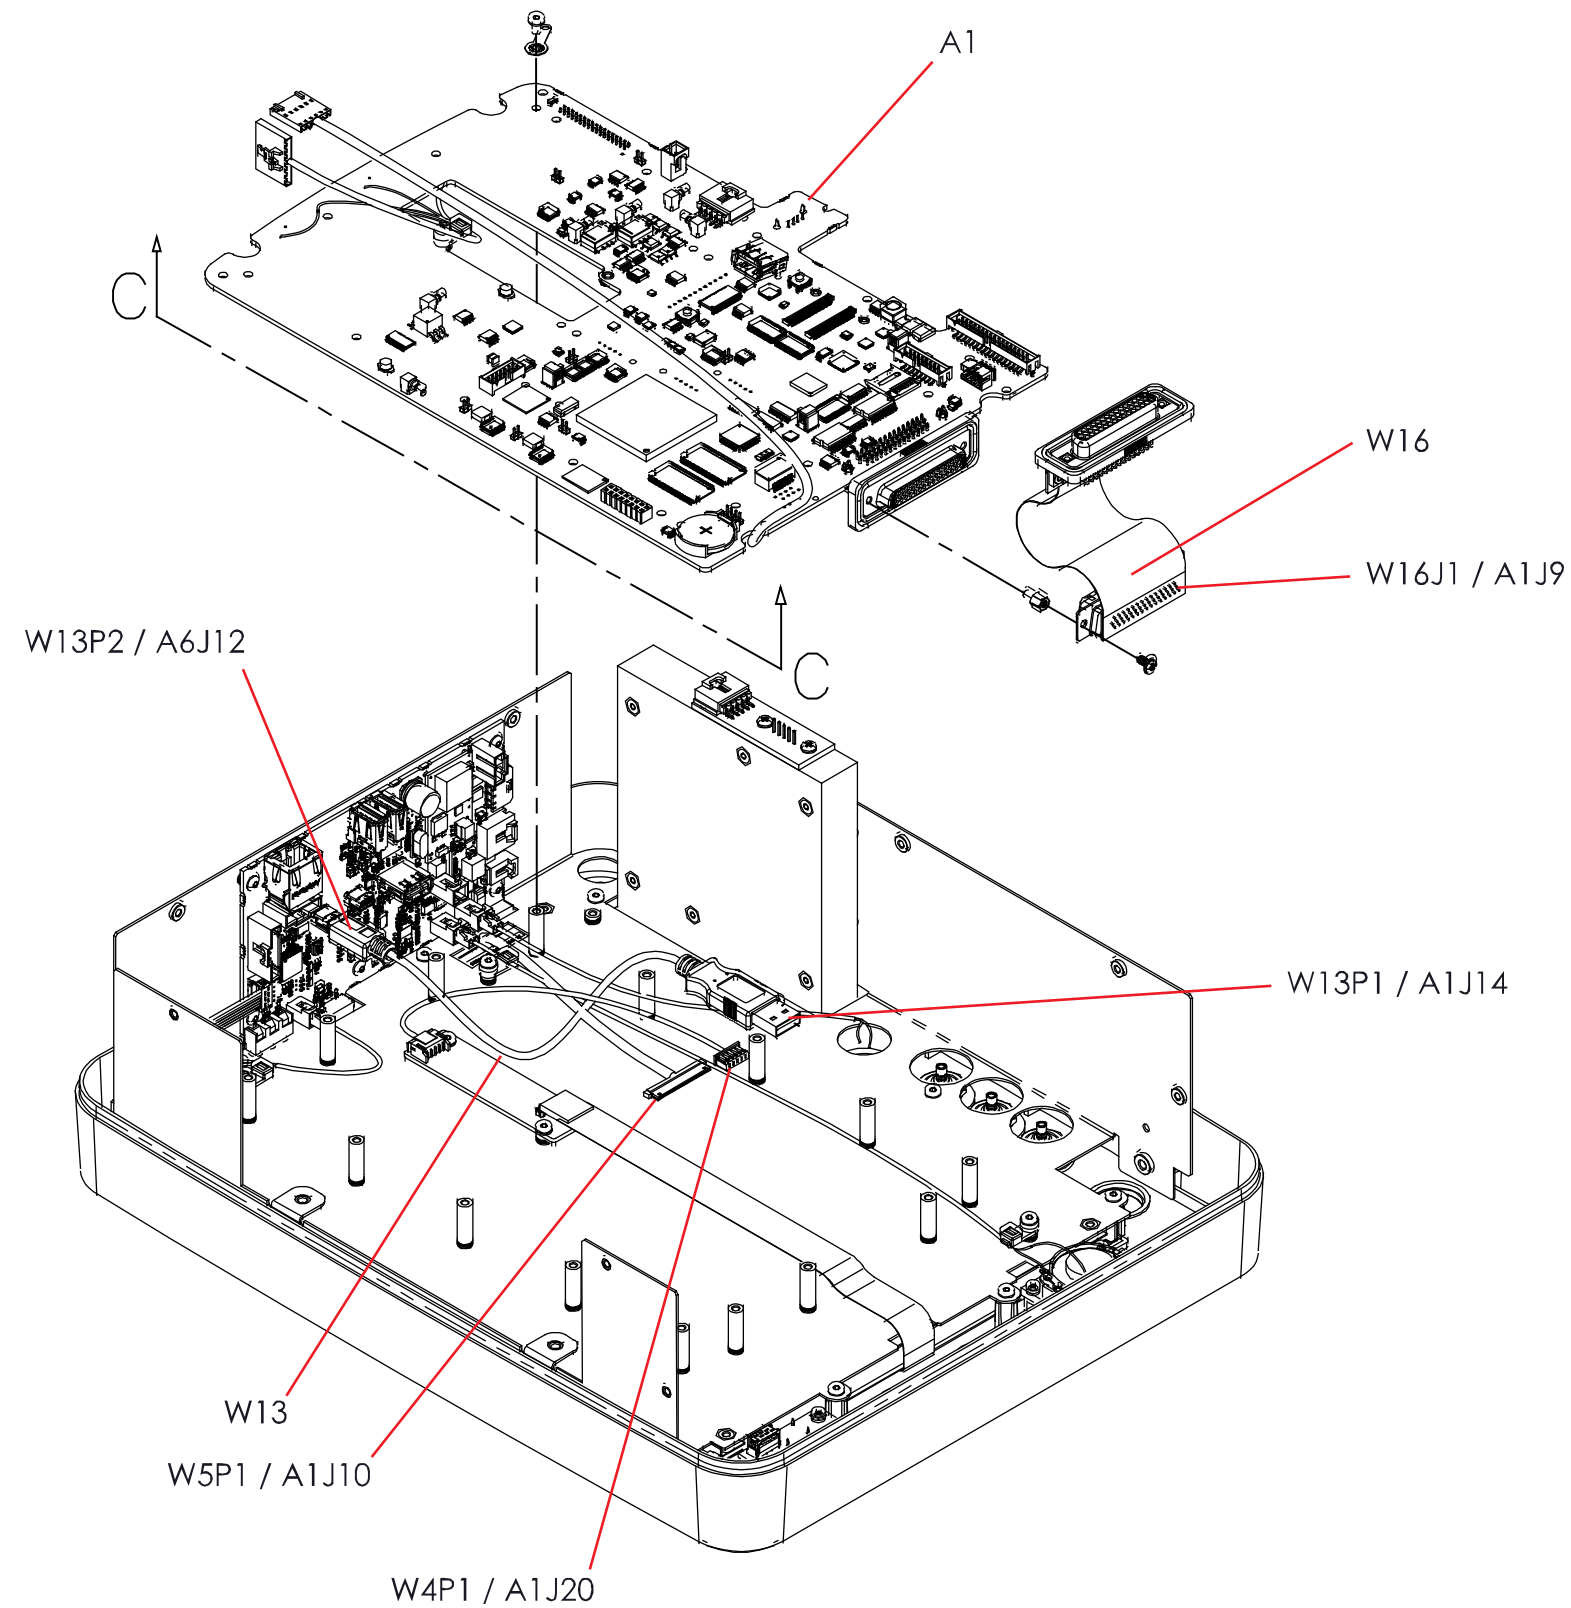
Front Chassis / Panel Assy (Sheet 4 of 6)
